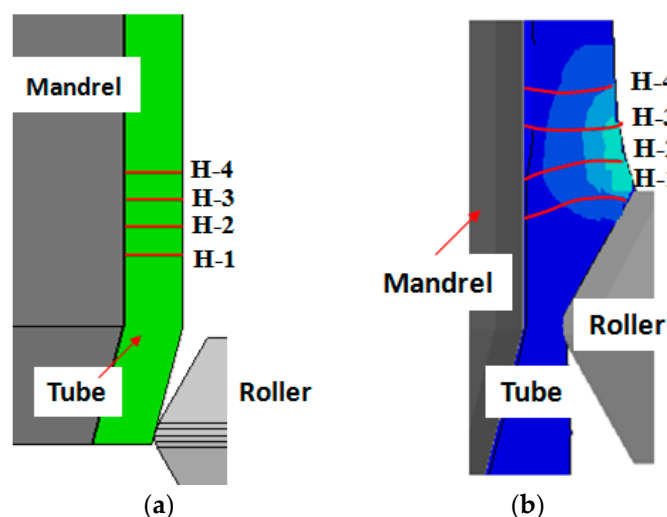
(a) Paths in tube blank and (b) paths in spun tube.
